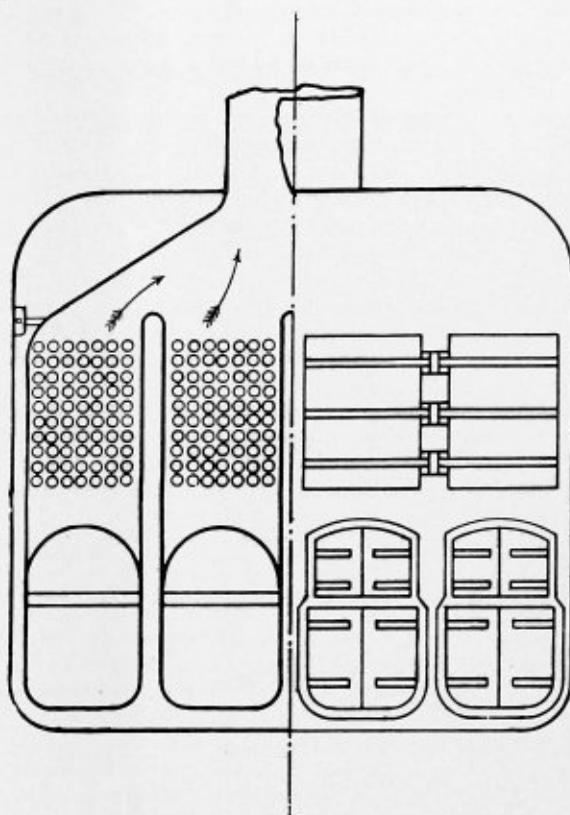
SECTION ELEVATION, FRONT VIEW
